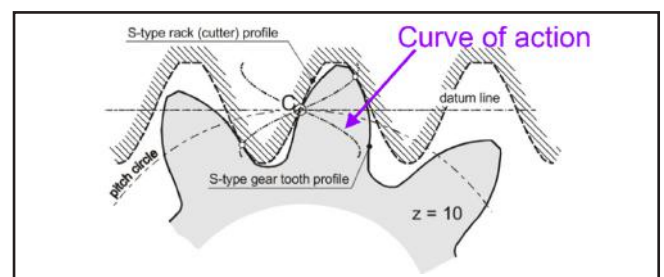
Rack cutting S-gears adapted from (Ref. 56)
